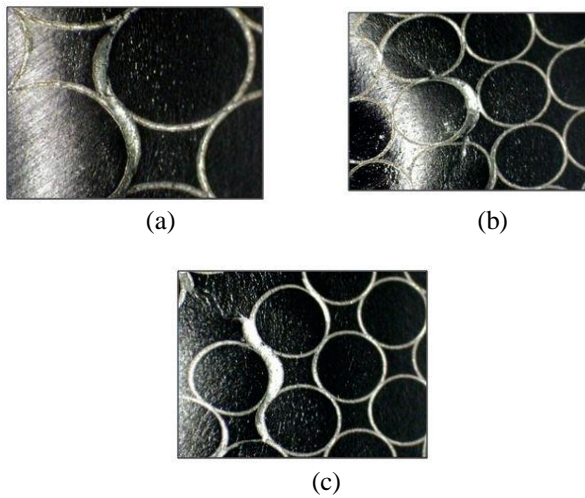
Failure Locations for laser marking during SPIF process: a) 0.5mm thick blank; b) 1.0mm thick blank; c) 1.6mm thick blank
